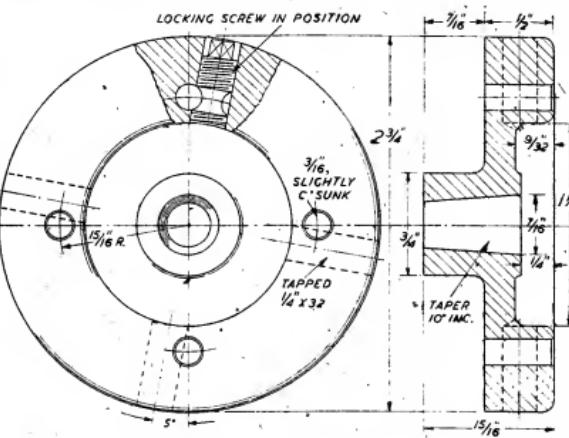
Details of flywheel, showing pivot locking screw in situ.
